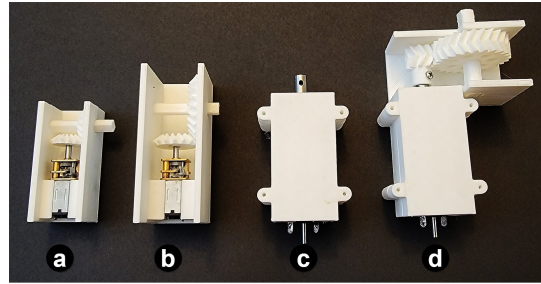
Example core mechanisms generated from the parametric library upon varying parameter settings. (a) Transverse shaft mechanism using bevel gears with a 1:1 gear ratio, (b) transverse shaft mechanism using bevel gears with 1:1.5 gear ratio, (c) inline shaft mechanism with 1:1 gear ratio (no gearbox required), (d) inline shaft mechanism using herringbone gears with 1:2.5 gear ratio.
